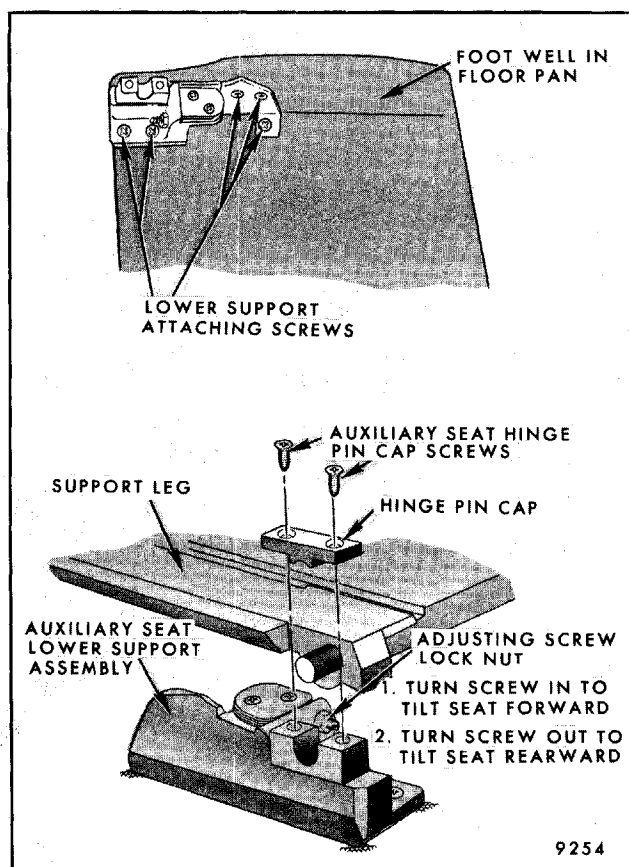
Auxiliary Seat Lower Support and Adjustment - Cadillac Limousine Styles
